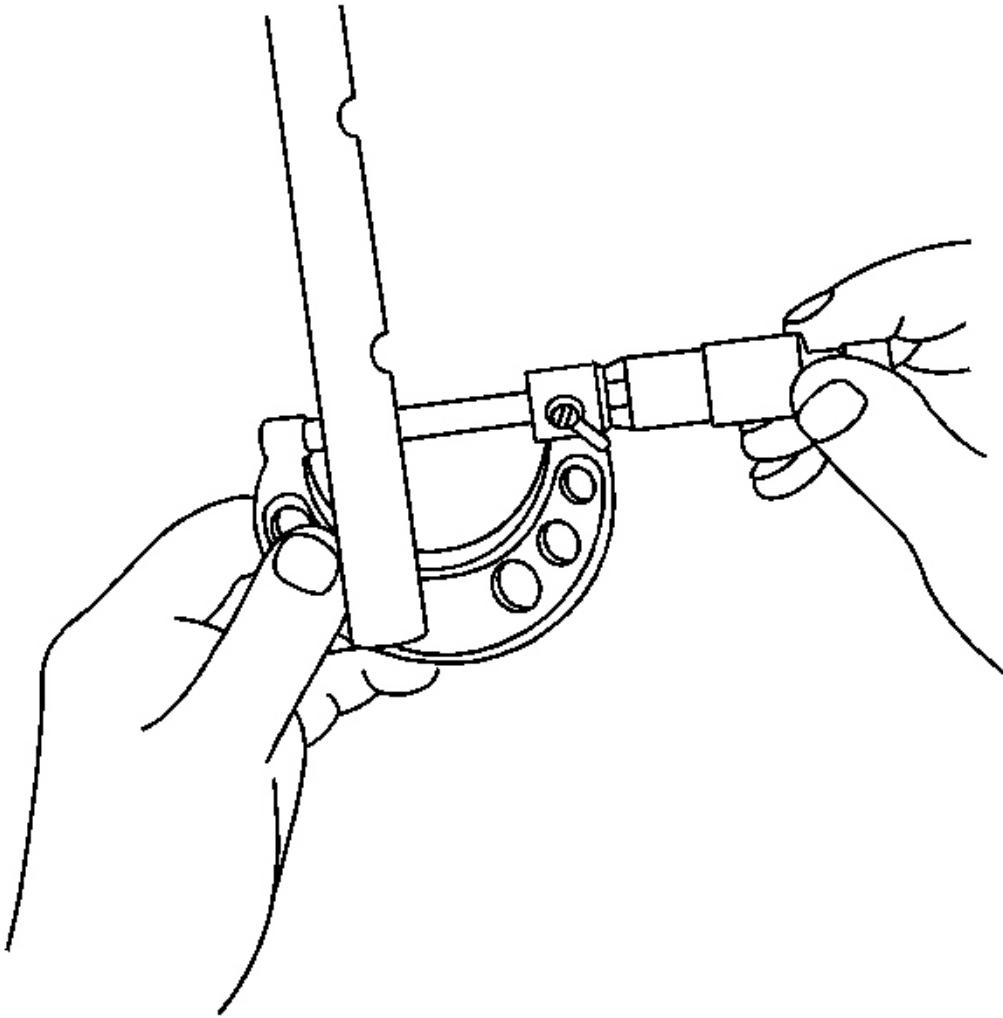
Measuring The Diameter Of The Rocker Arm Shafts
